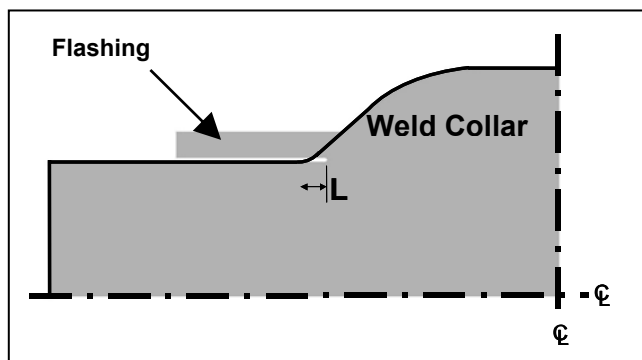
Cross section of thermite weld collar showing the flank angle and toe radius<sup>2</sup>
